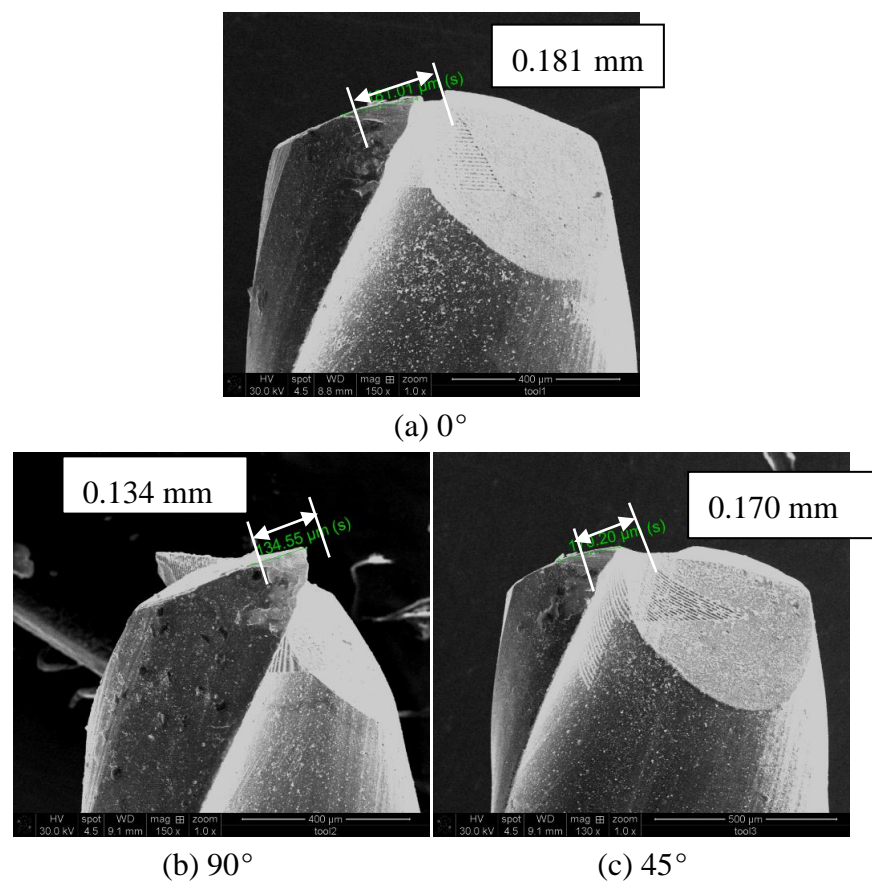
Measured flank tool wear of the microstructured tools after the third set of cutting trials
